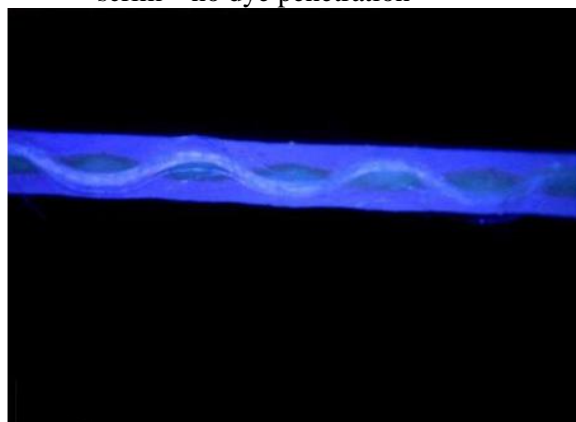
Frame panel / outer panel weld – dye penetration inner side panel
